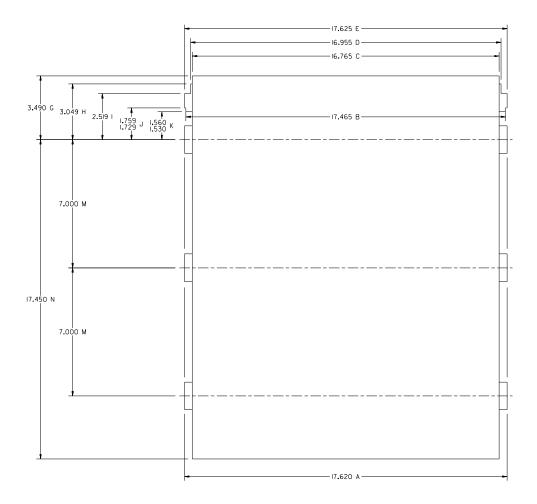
Maximum 12-PU Drawer Envelope (Front View)
